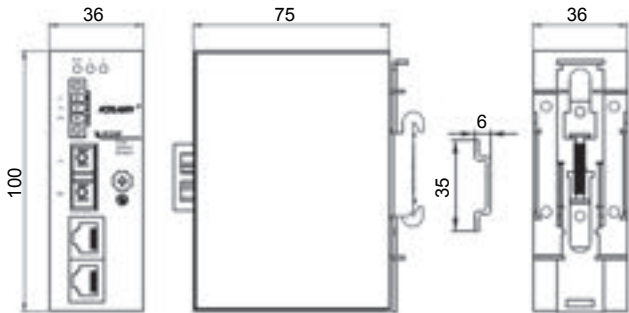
Dimensions for DIN-Rail Mounting (unit: mm)
